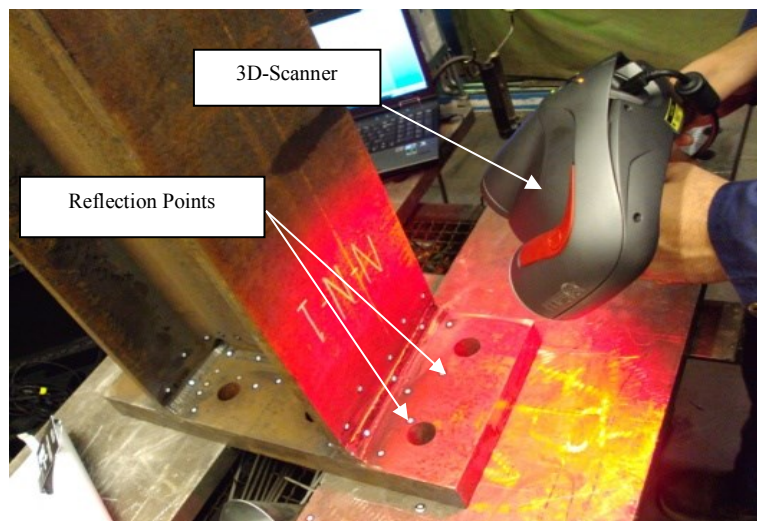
The 3D scanner and reflection points used to model the weld surfaces.
